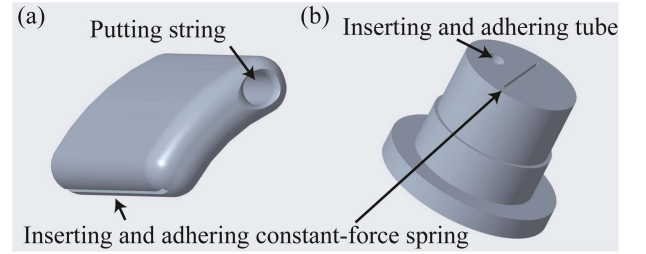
Components by 3D printing used to fabricate prototype. (a) Insert into tip of constant-force spring. (b) Insert to base of constant-force spring.
